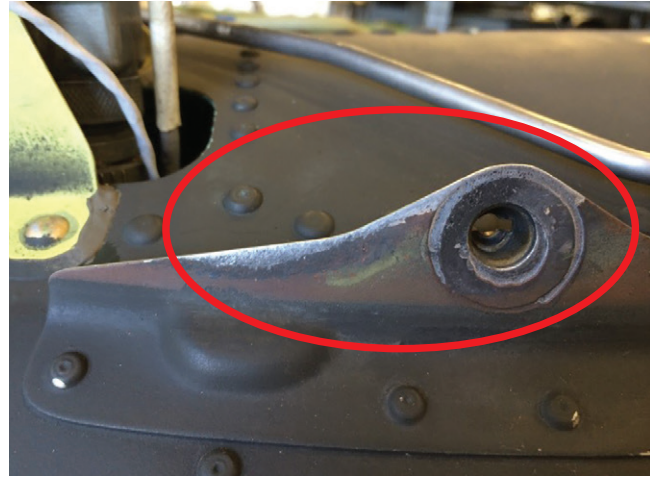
Typical example of fretting damage on tail boom structure around the fastener receptacle.
